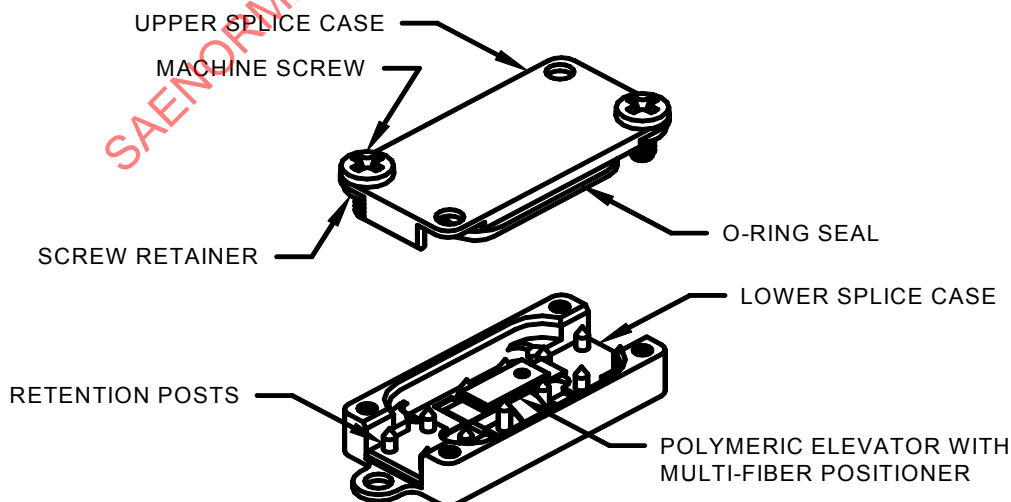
Exploded Isometric View of Mechanical Splice Assembly
